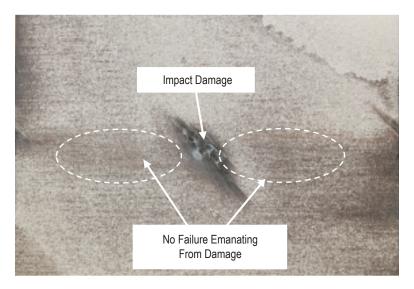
Photograph of core side of face sheet at impact damage on specimen in figures 11 and 12 to show that failure did not initiate from the impact damage in the face sheet.
